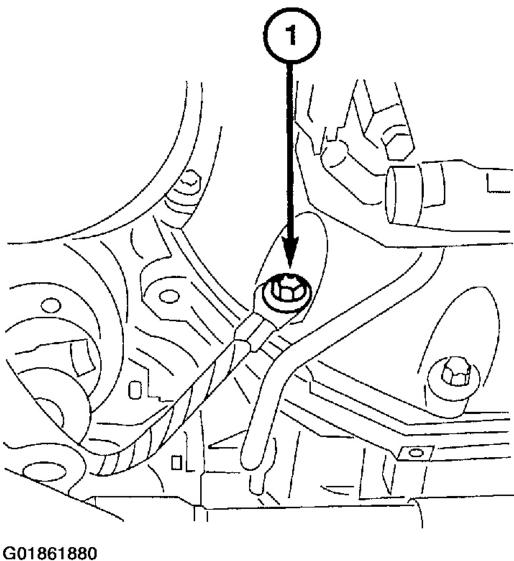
Bolting Ground Cable At Transmission Courtesy of DAIMLERCHRYSLER CORP.
